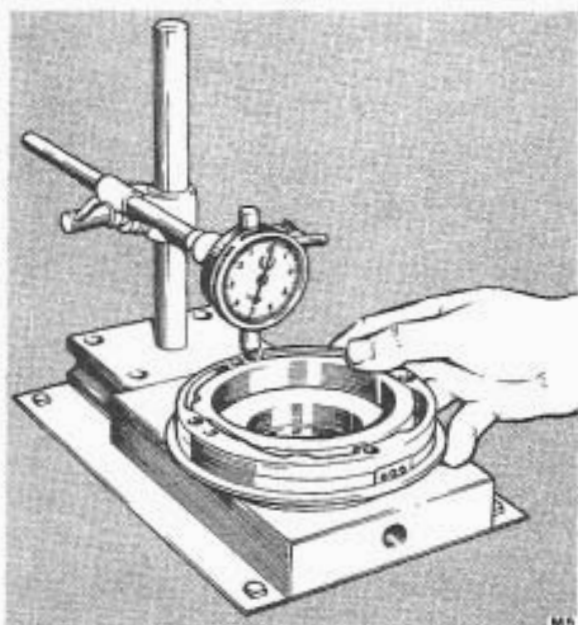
CHECKING THE SLIDE END CLEARANCE
